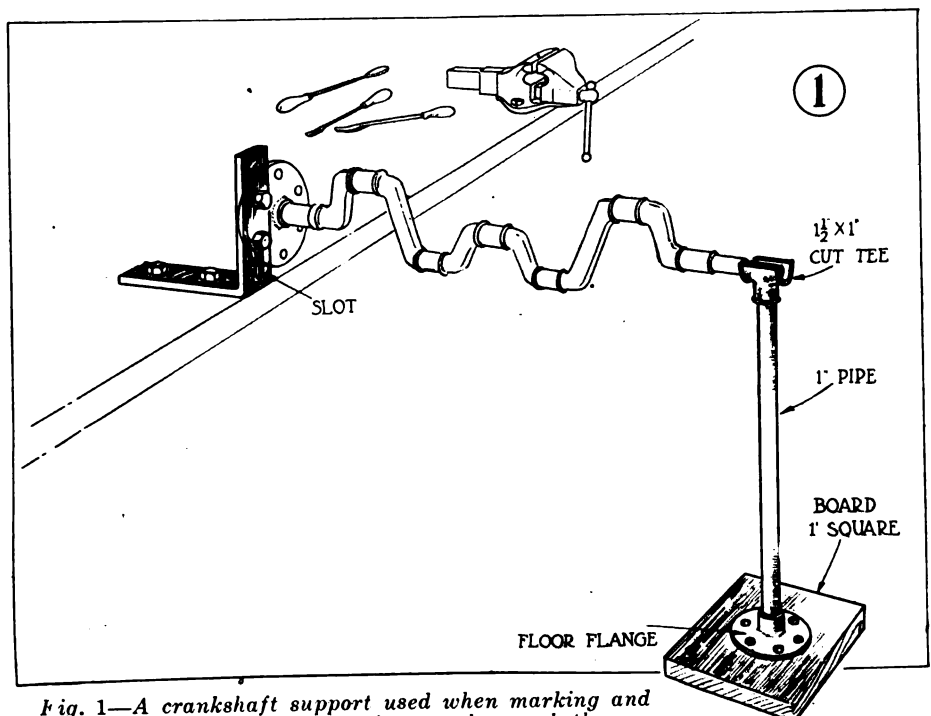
A crankshaft support used when marking and fitting the connecting-rod bearings to the crank throws. The fitting on the bench is bolted on, the end support being movable
